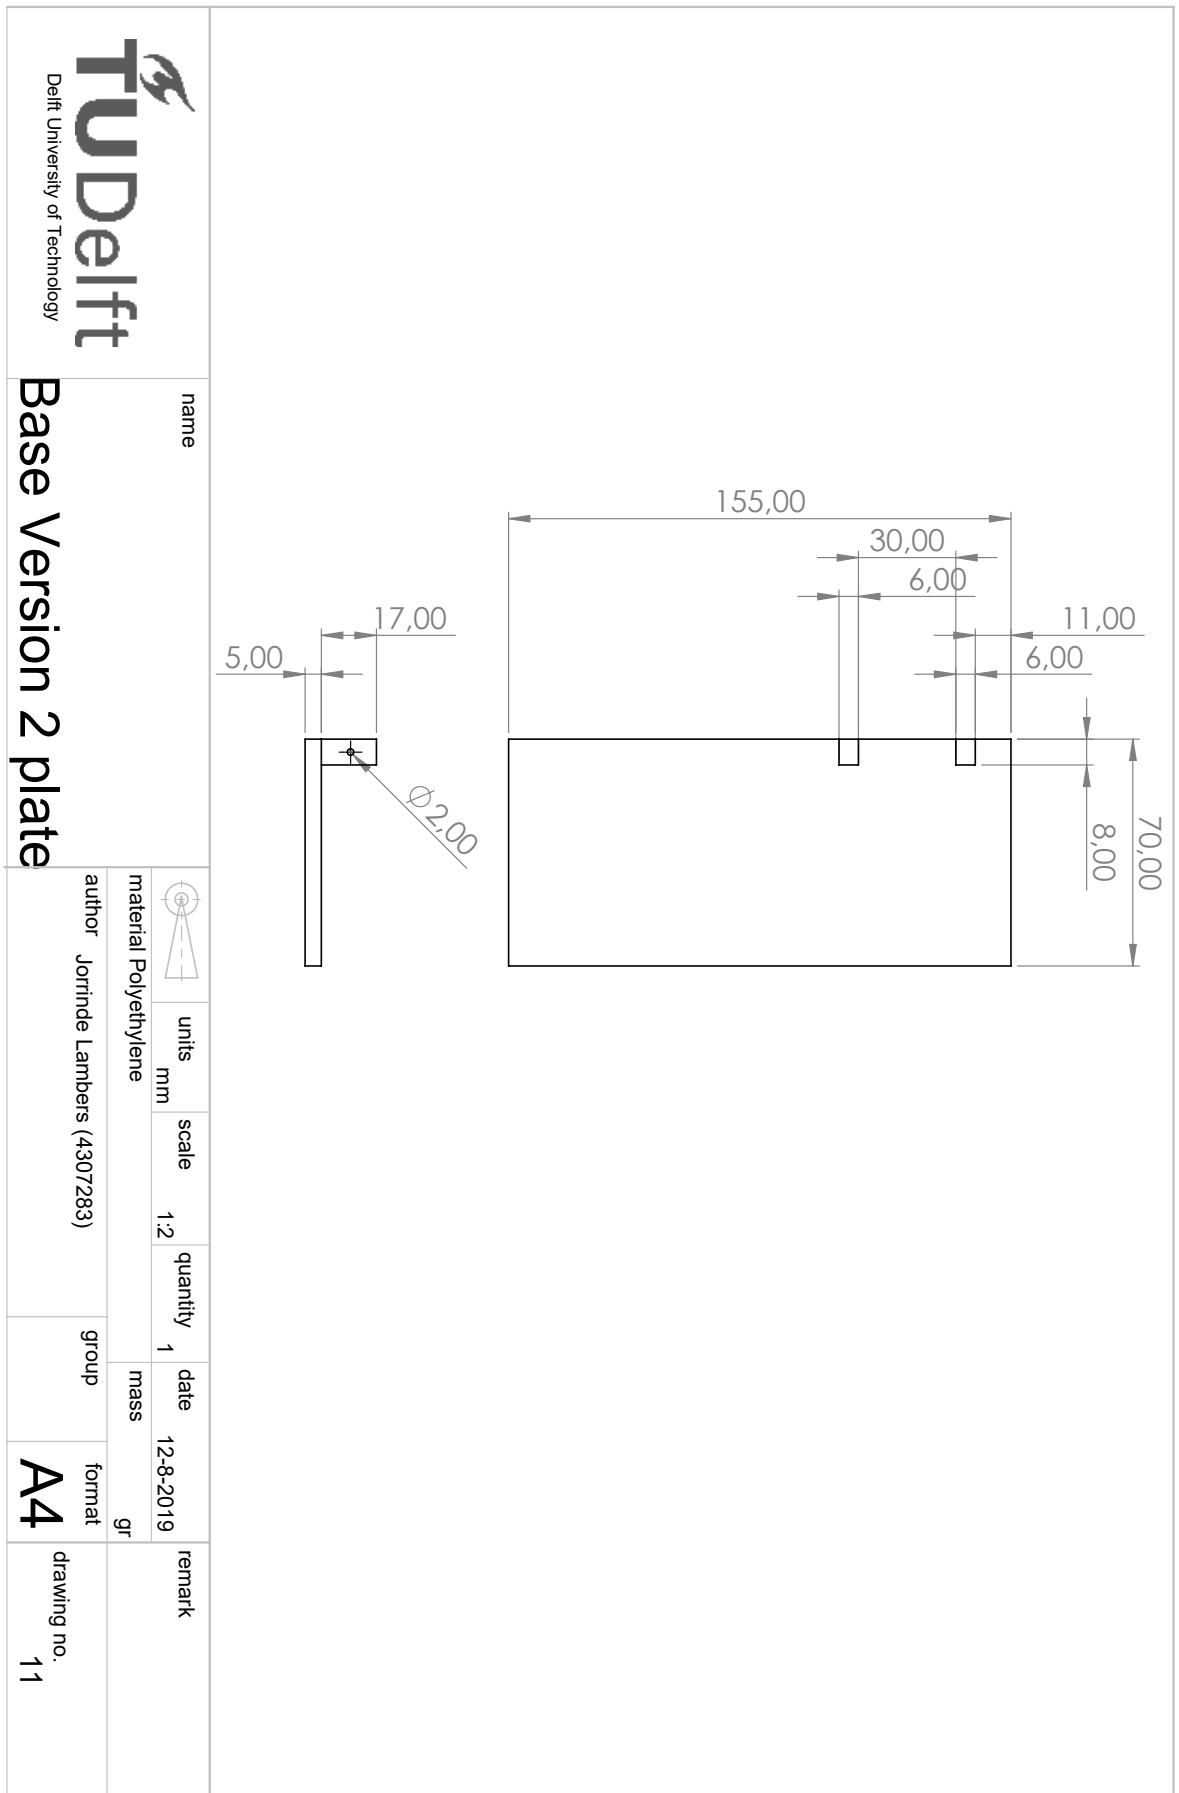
SolidWorks drawing of the plate of base version 2.
